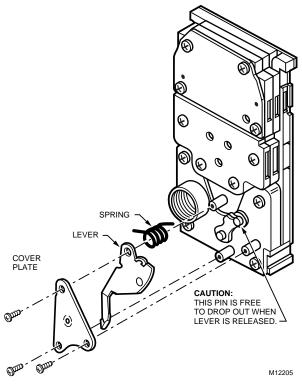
DAY/AUTO Lever Assembly Replacement.
